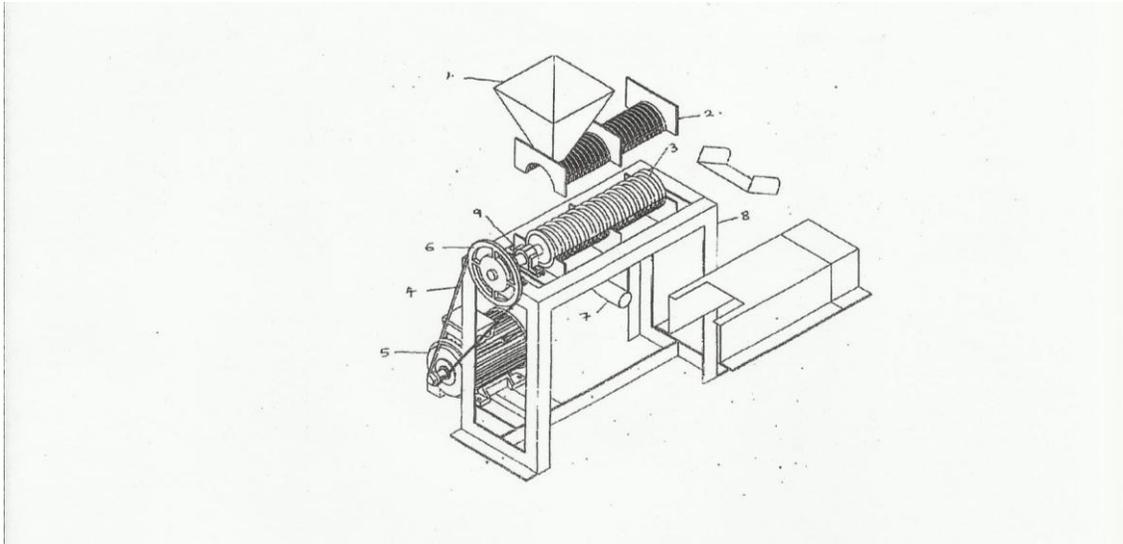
Exploded view of the milk extractor 1-hopper, 2- Barrel, 3- worm shaft, 4- transmission belt,5- electric motor, 6- pulley, 7- milk outlet, 8- frame,9- bearing
